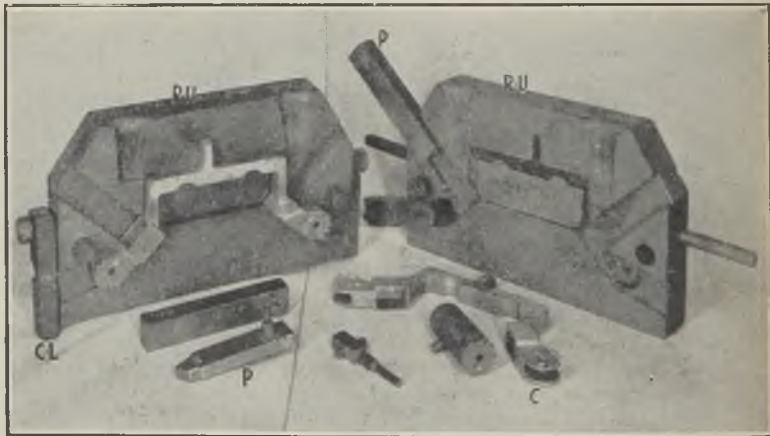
PERMANENT CAST-IRON DIE, WITH ALUMINIUM-BRONZE DIE-CASTING AND DIFFERENT PLUGS.
